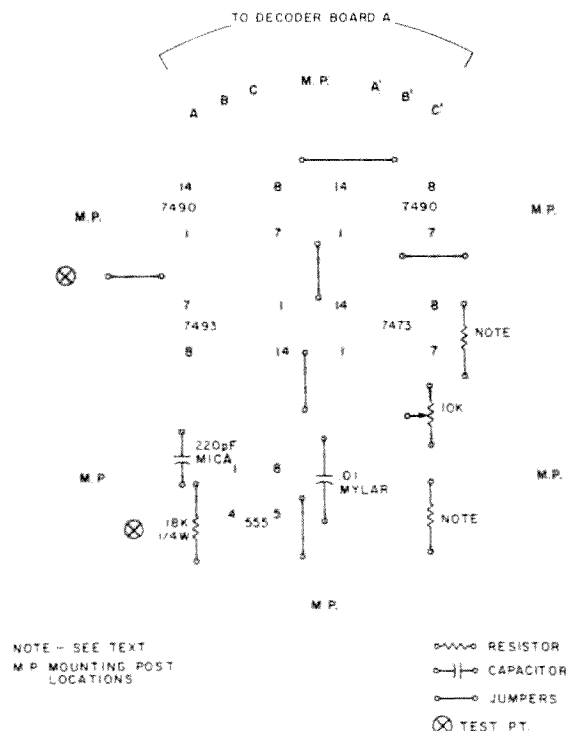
Component side of counter chain board. Standard schematic symbols are used to show component mounting locations. Solid lines connecting dots indicate jumper leads. Circled x indicates test point.
